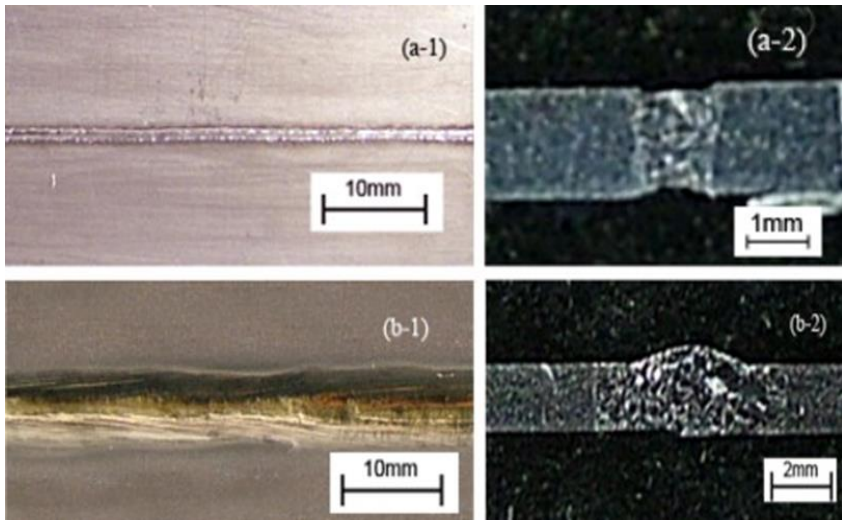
Comparison of joints welded at a m/min welding speed: The top bead appearance in the fiber laser welded junction is shown in (a-1) and the cross-section in the fiber laser welded joint is shown in (a-2). The top bead appearance in the laser-GMA hybrid welded joint is shown in (b-1).
